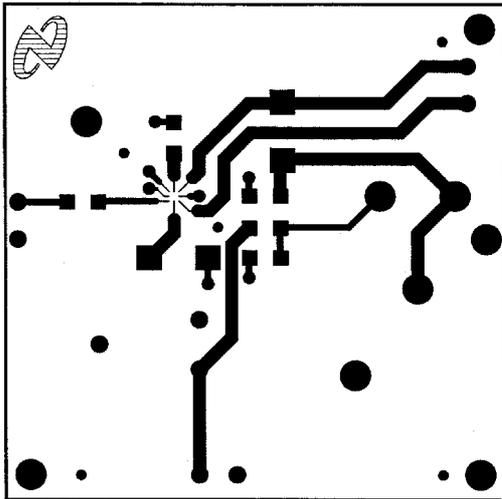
Recommended micro SMD PC board layout: component side layout
